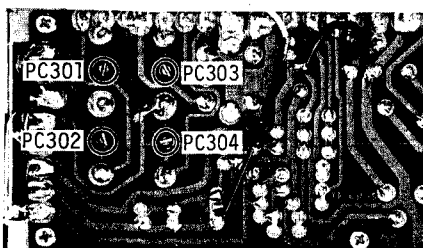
POWER SUPPLY P.C. BOARD (51671760)
